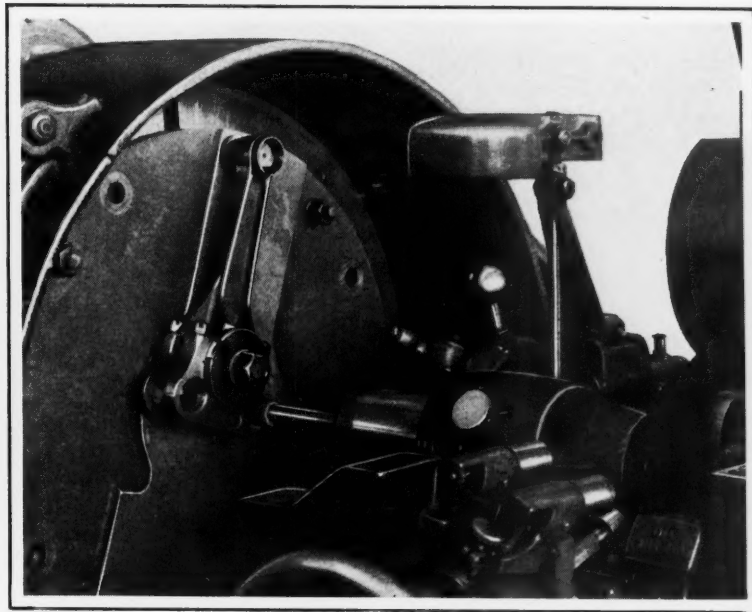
One of the Grinding Operations Performed in Finishing the Different Bearing Holes
